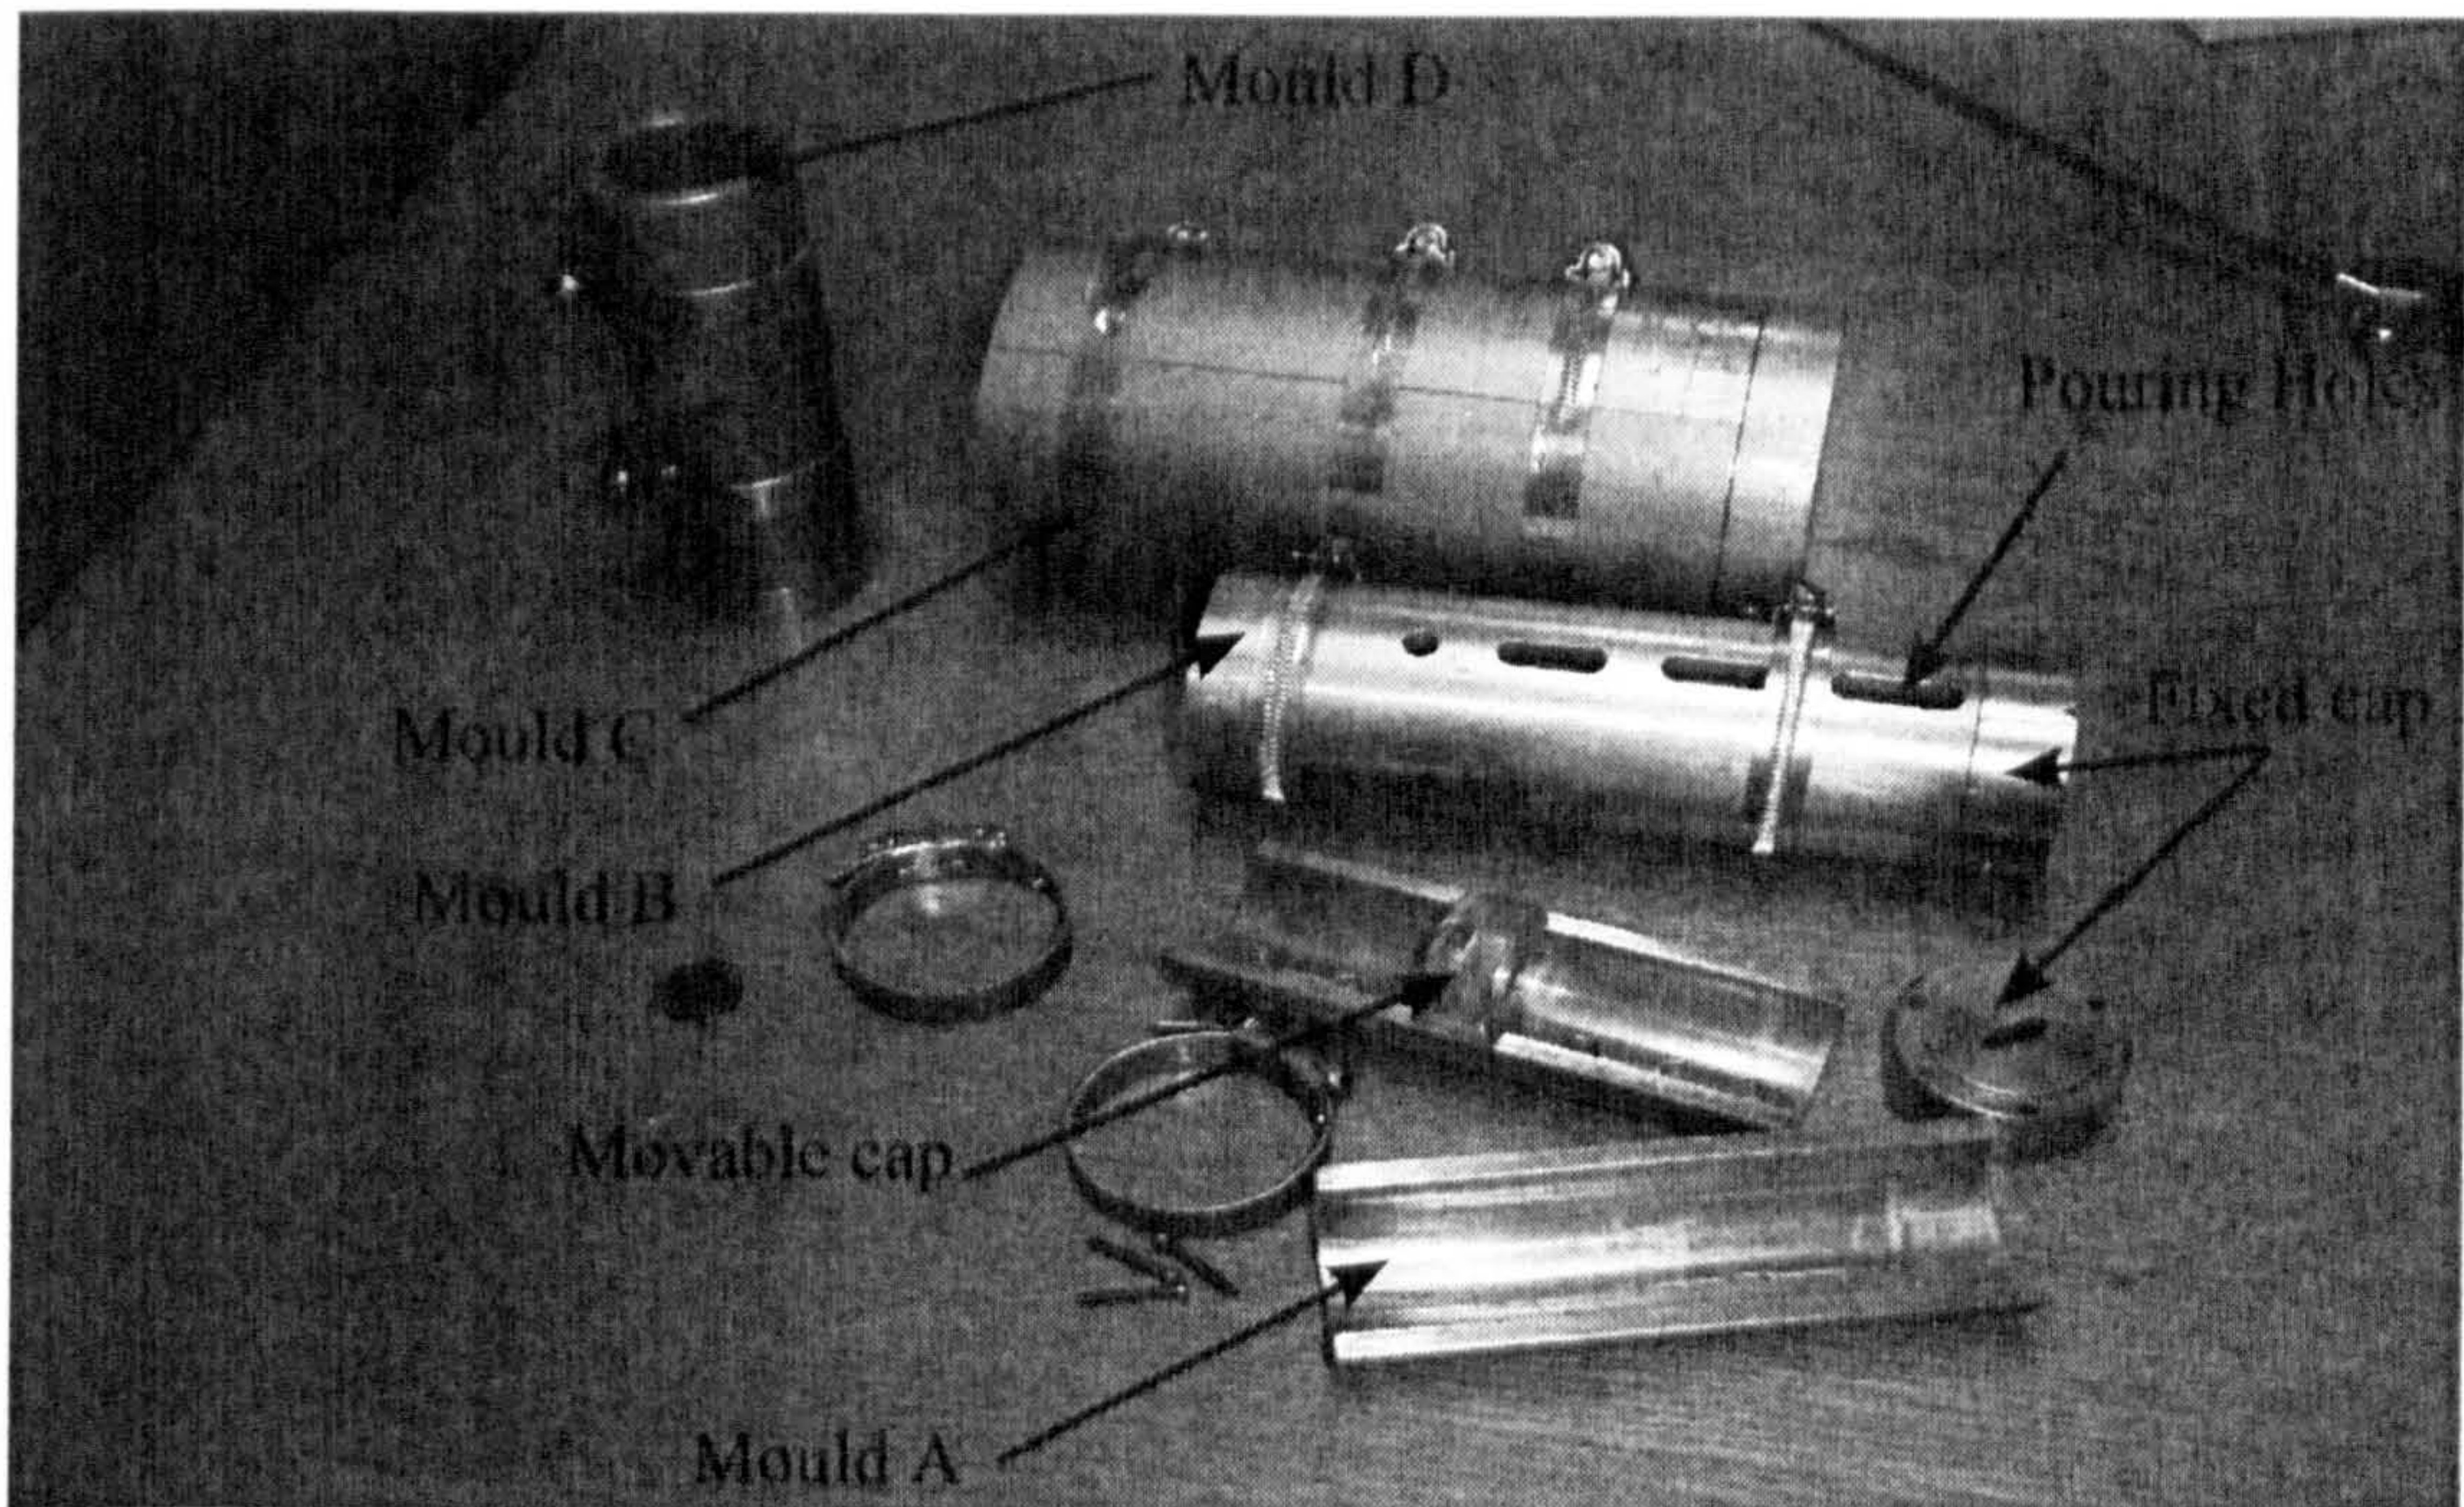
4 moulds used to prepare the polyurethane rubber samples.
